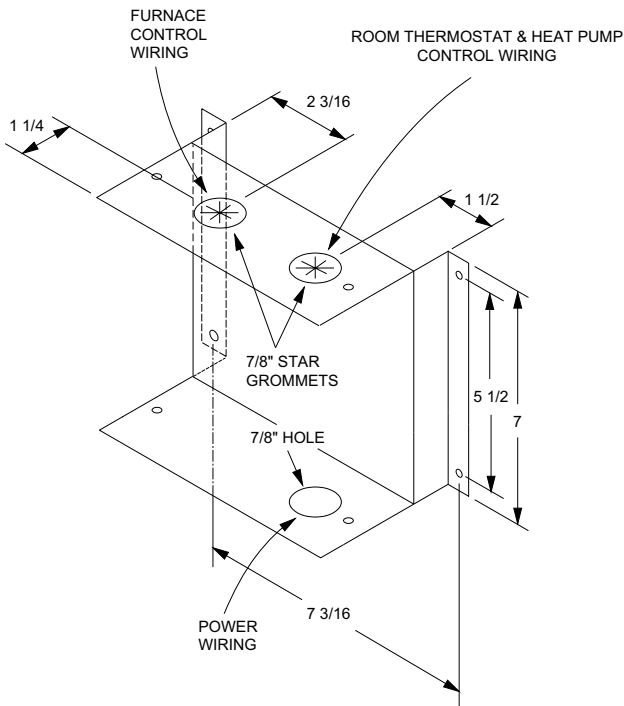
CONTROL PANEL DIMENSIONS AND MOUNTING HOLE LOCATIONS
